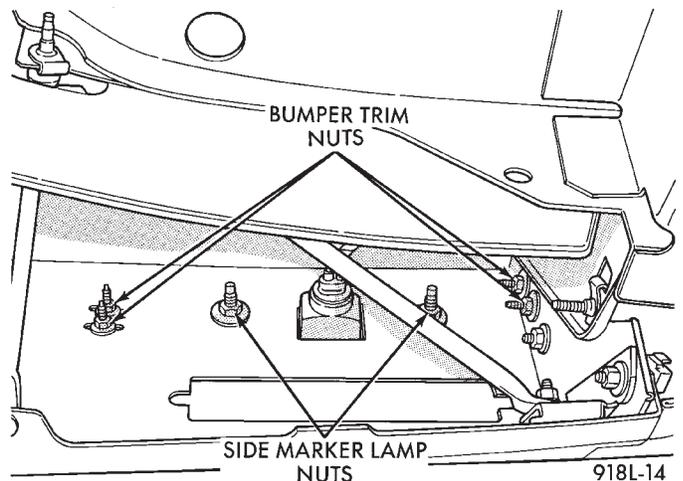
Bumper Trim Moulding Nuts — AY/C-P-Body
